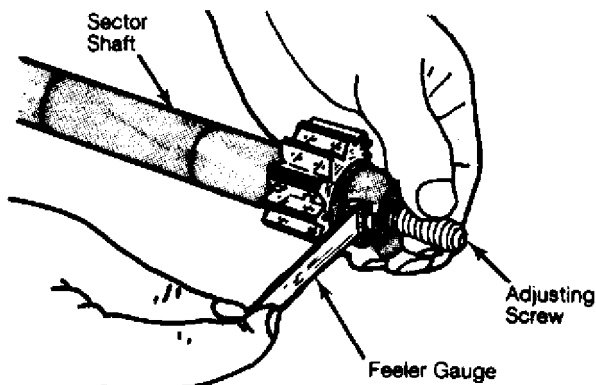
Checking Sector Shaft Adjusting Screw End Clearance
